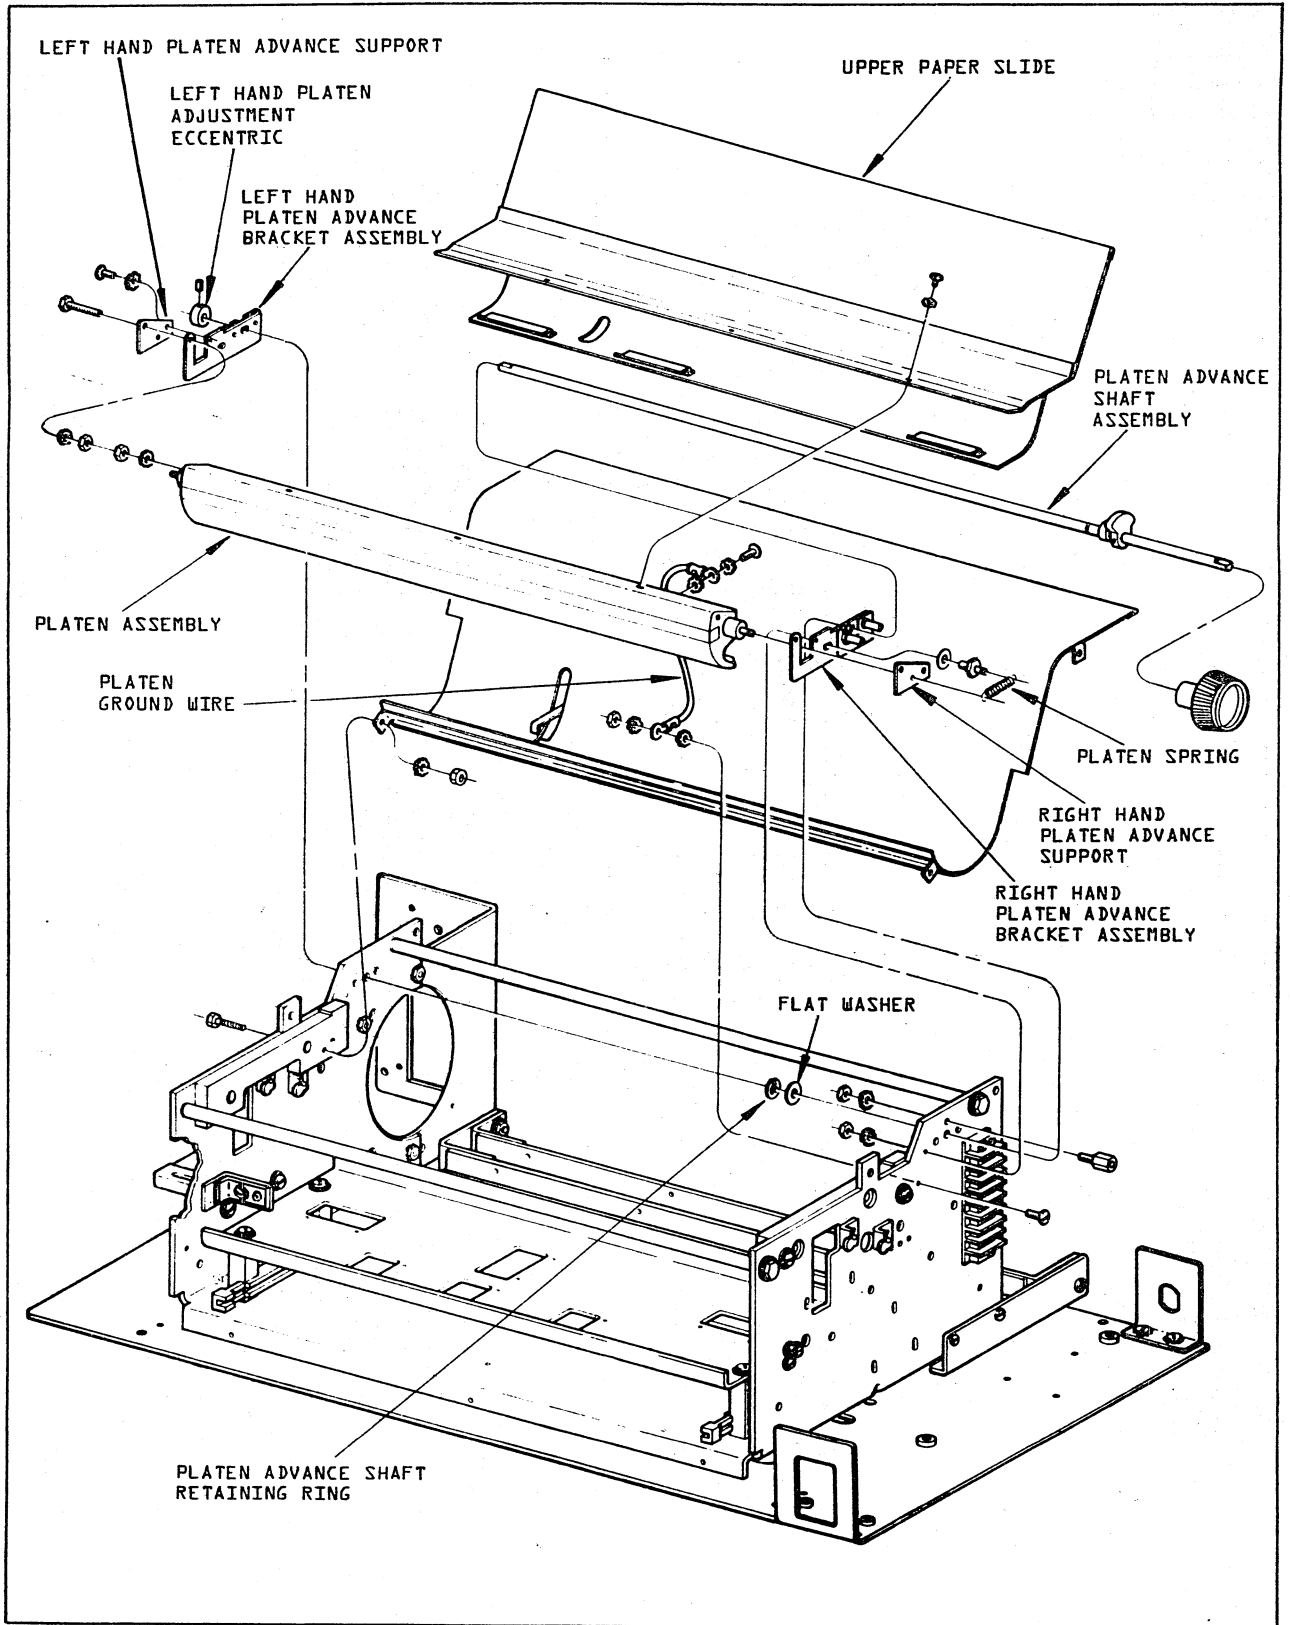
PLATEN ADVANCE SHAFT ASSEMBLY REPLACEMENT AND PLATEN ASSEMBLY REPLACEMENT
